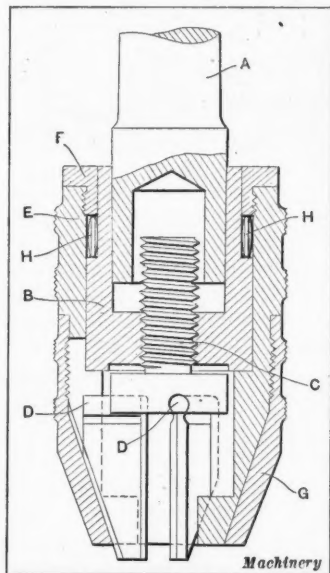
Cross-sectional View of Eclipse Drill Chuck
